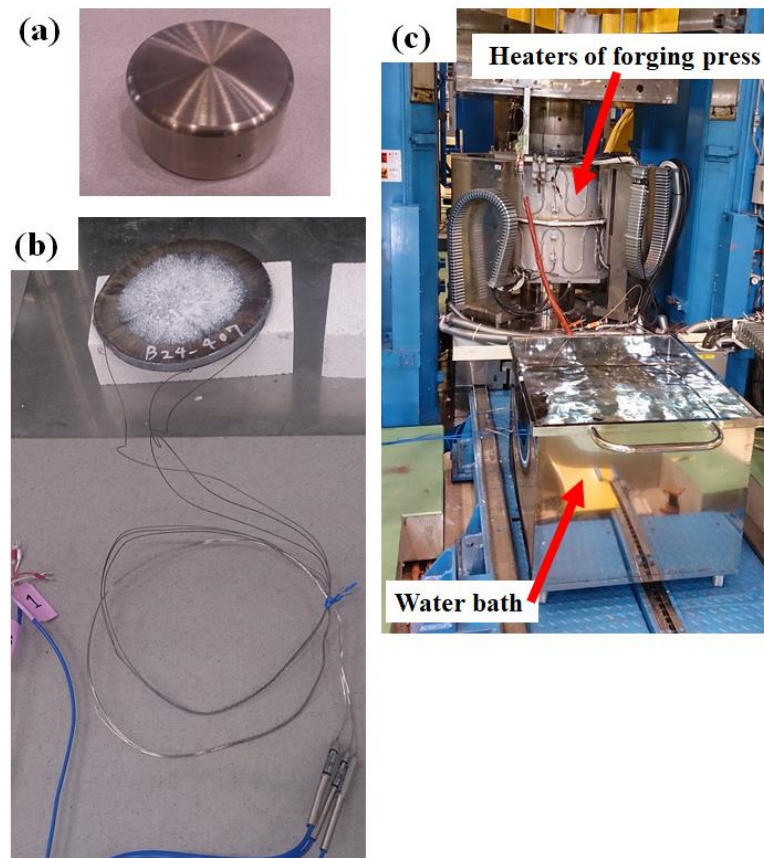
Workpiece (a) before and (b) after forging. (c) External view of the heaters of the 1500-ton forging press and a water bath located next to the press.
